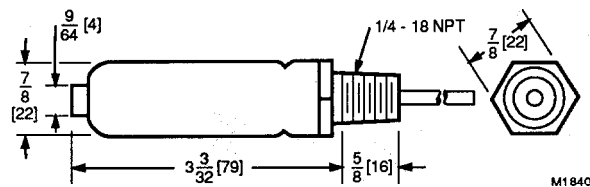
Dimensions in inches [mm] of C7008A flame rod assembly, coverless model
